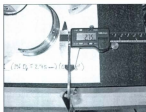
Stacked feeler gauges and calipers verifying thickness.
